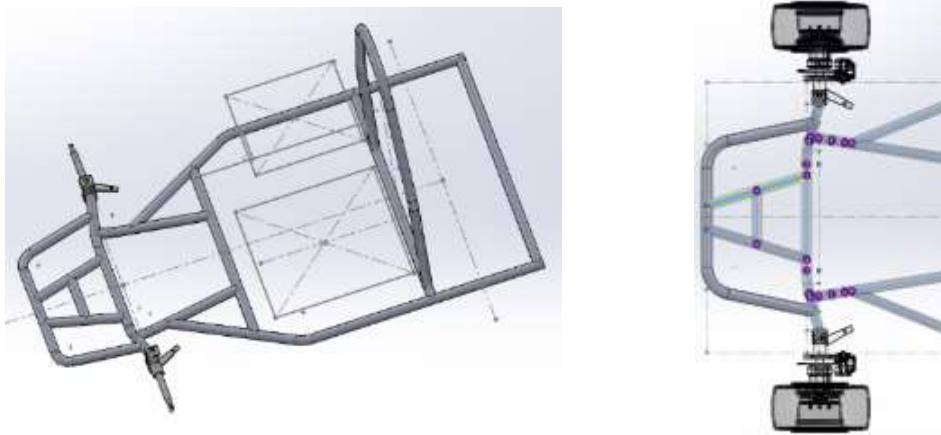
CAD of Steering Knuckle & C-shaped Mount Placement on Chassis
